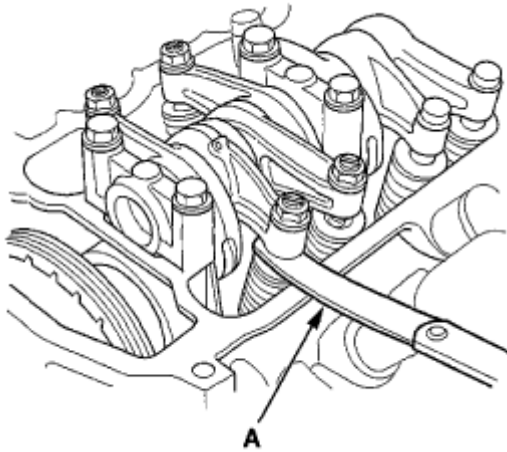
Inserting Feeler Gauge Between Adjusting Screw And End Of Valve Stem On No. 1 Cylinder
